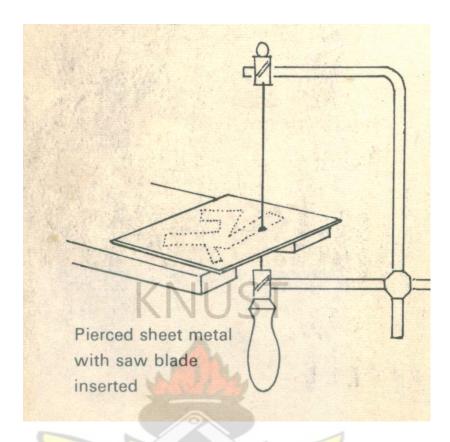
Pierced sheet metal with saw blade inserted. (Source: Gentille, 1976)
